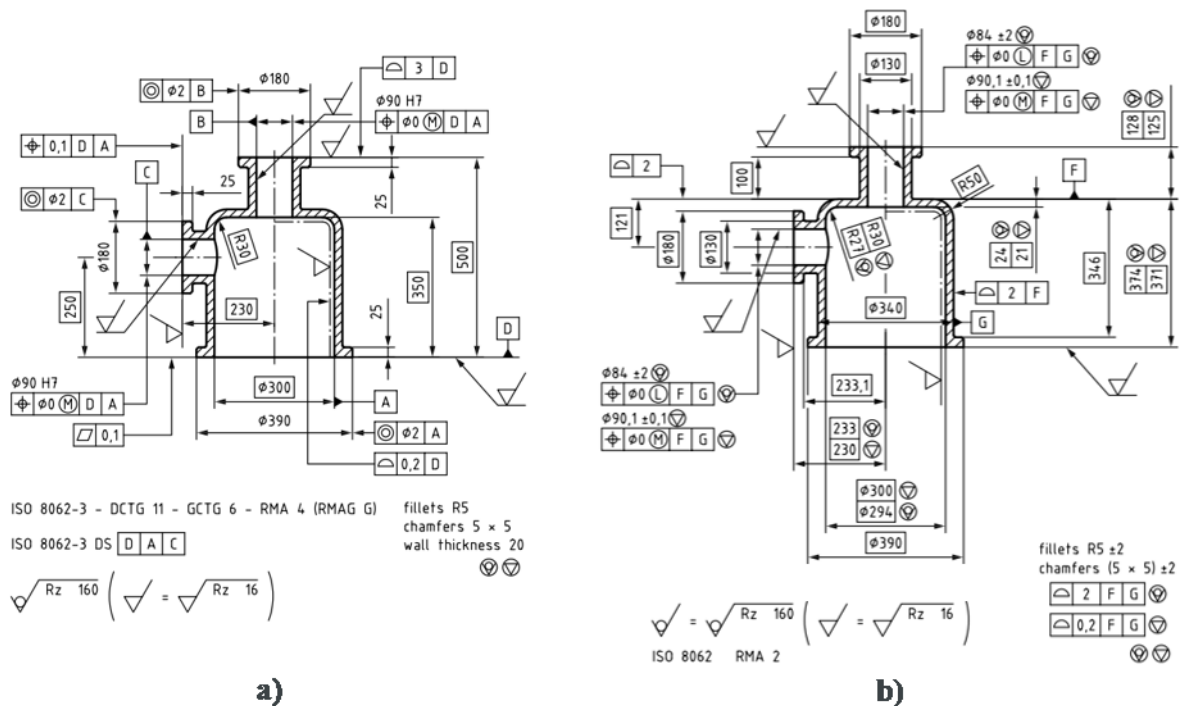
Exemplary drawings according to ISO 8062-2. A) accumulation method with ISO 8062-3 general tolerances, b) multiple tolerancing method with general surface profile tolerances. Symbols $\textcircled{\text{M}}$ and $\textcircled{\text{F}}$ indicate the final moulded and machined conditions of the casting, respectively. [14]
